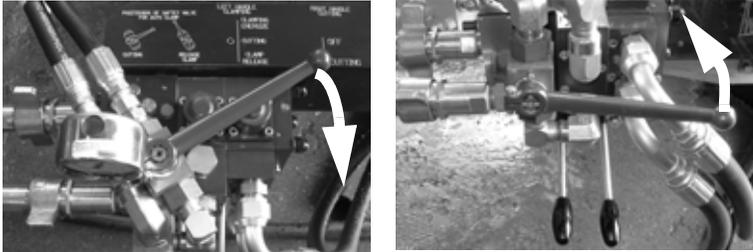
Open the clamping circuit valves to allow the clamping drive to disengage.
